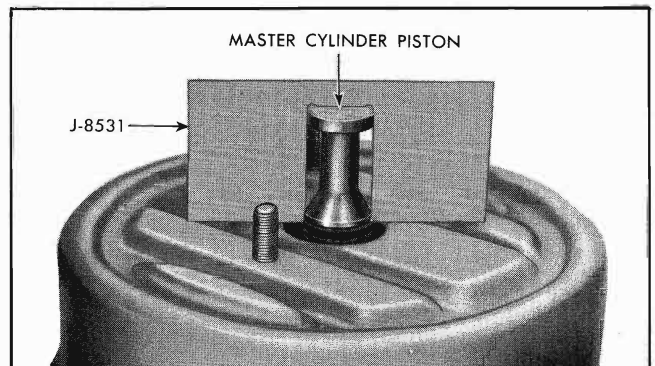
M-24 Checking Master Cylinder Piston Adjustment
